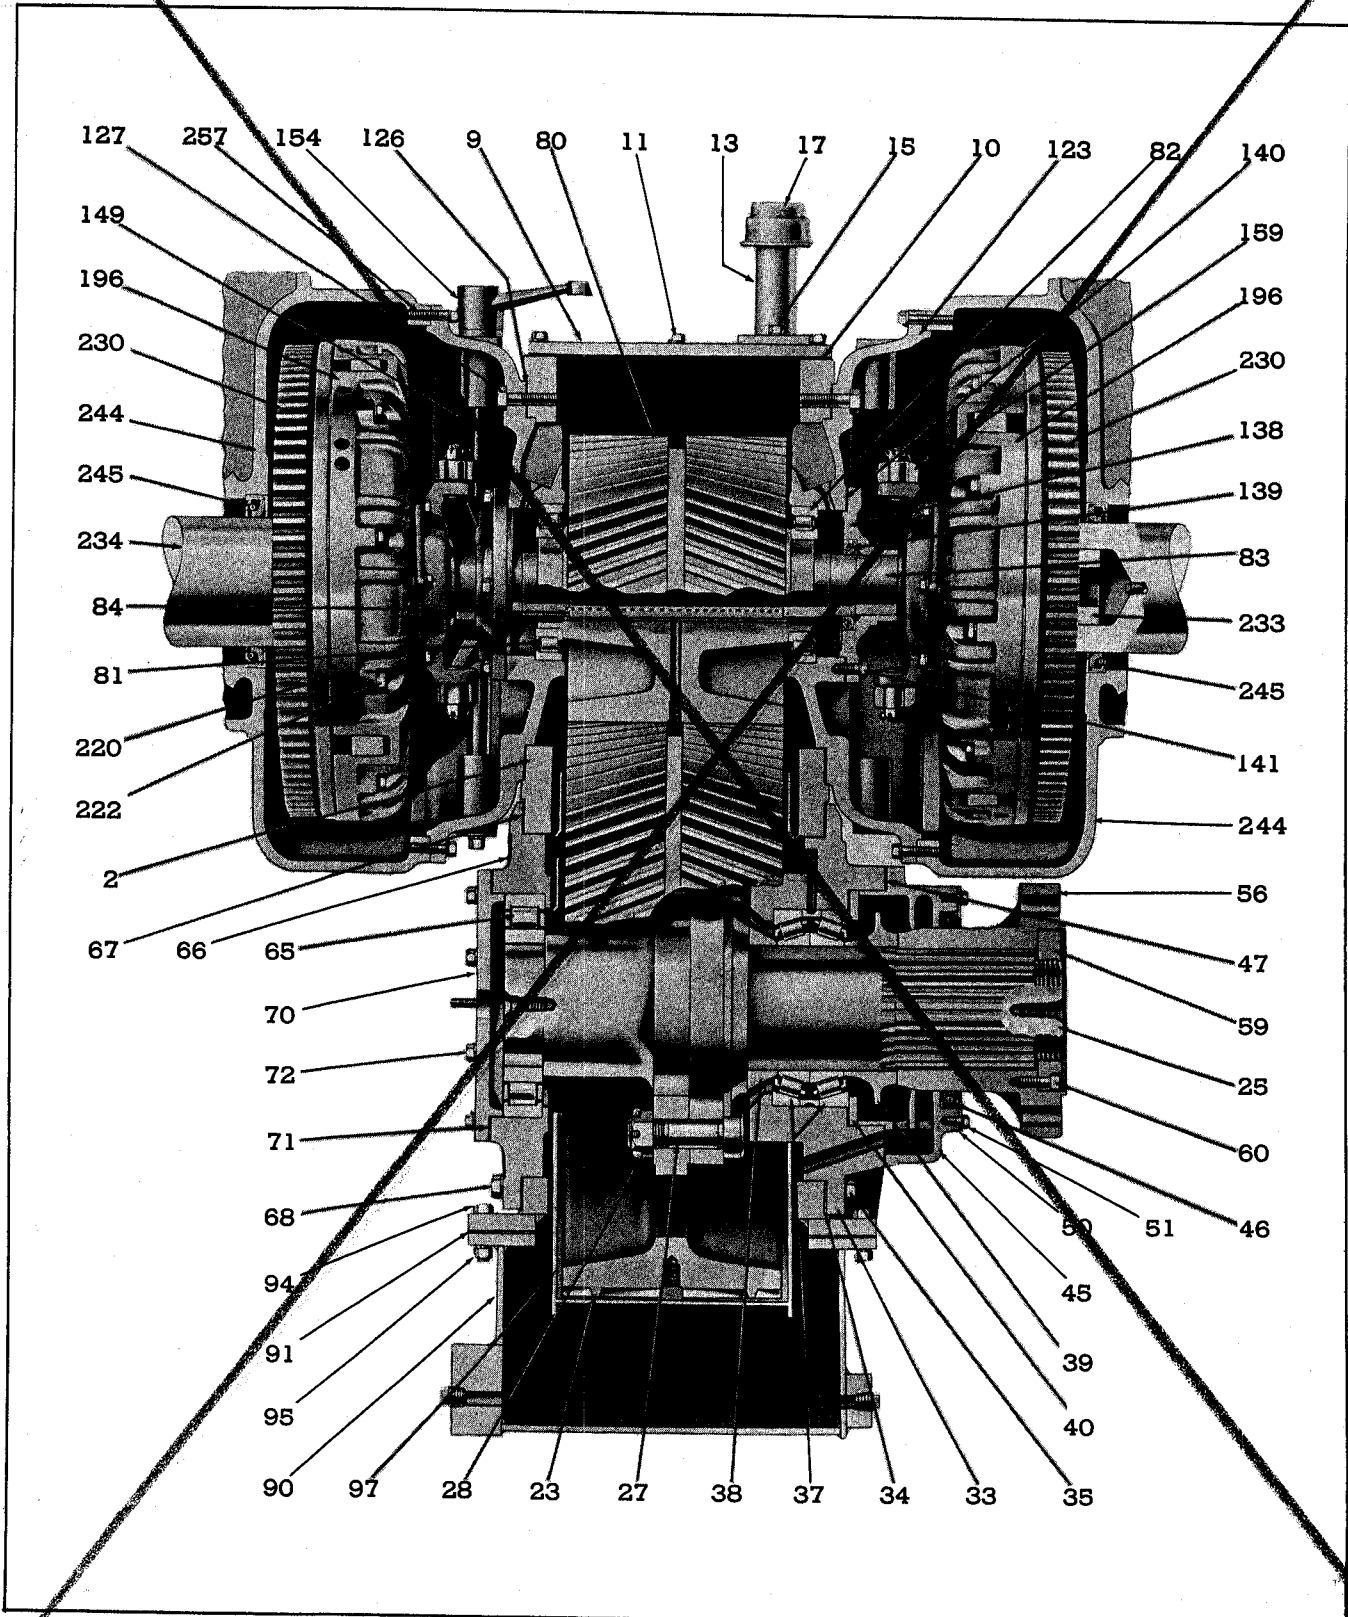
Quad Engine Reduction Gear and Clutch Assembly.
